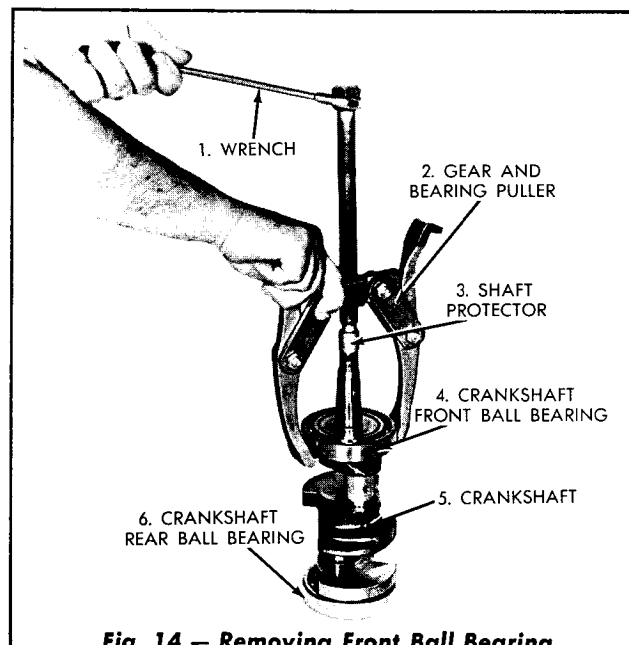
Removing Front Ball Bearing from Crankshaft
